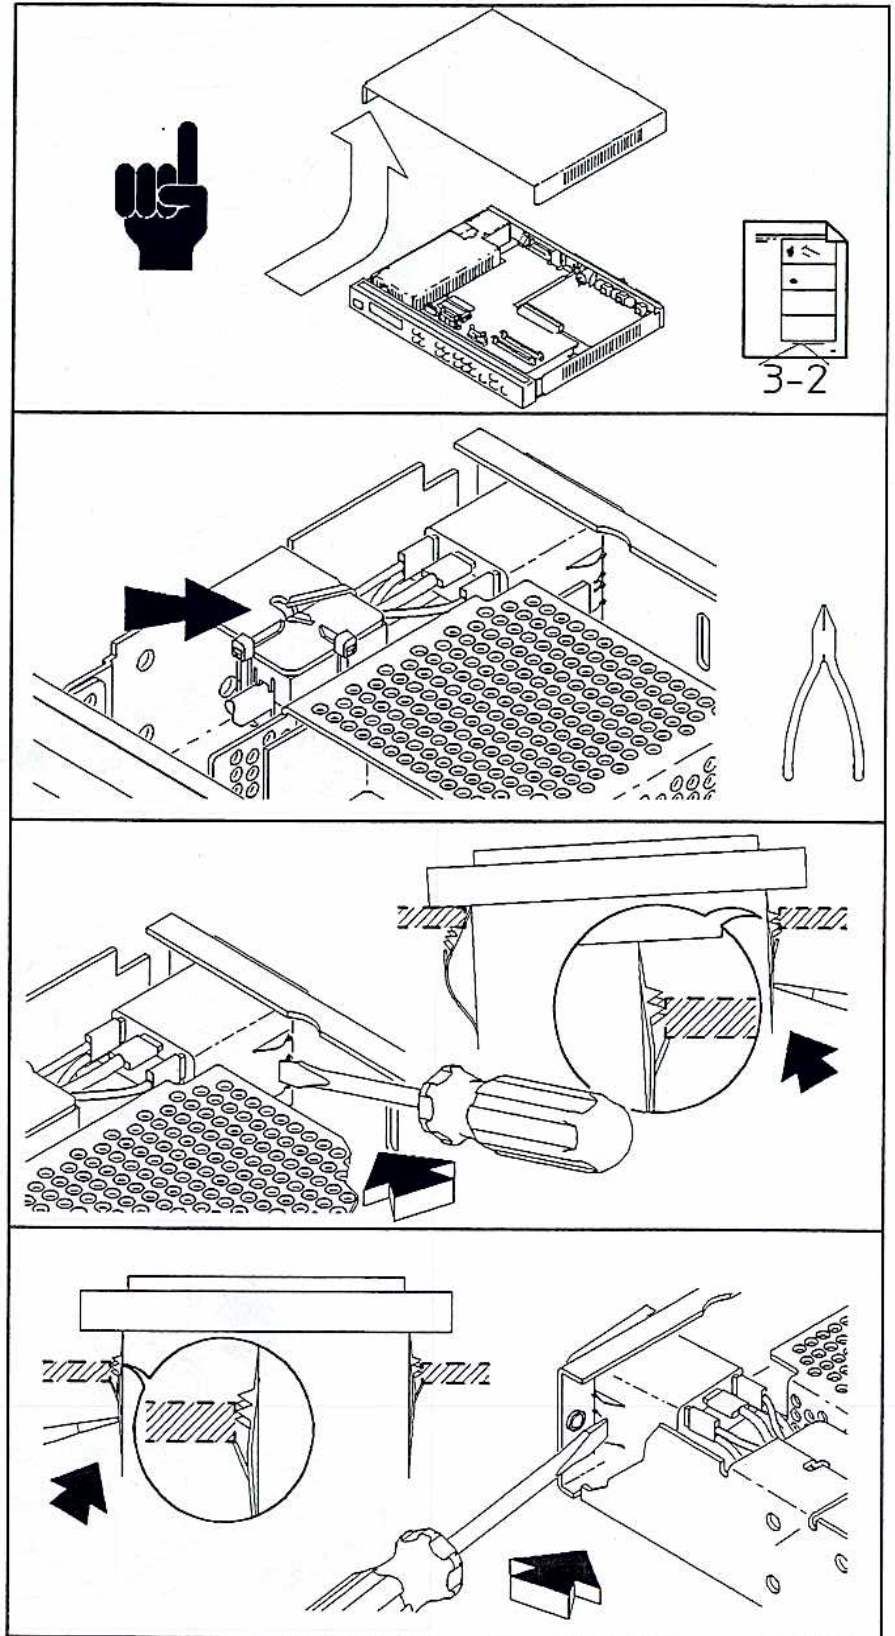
Line Module Removal (HP Remote Front Panel; 1 of 3)
